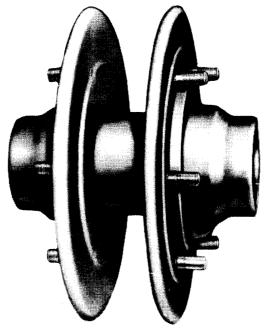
Bogie Roller with Bearing and Oil Seal Removed
